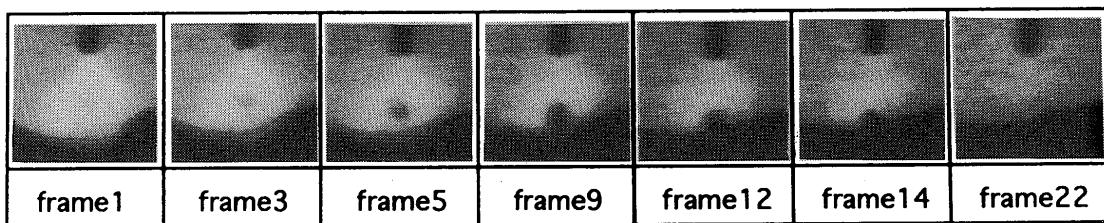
Droplet transfer of AC-pulsed GMA welding
